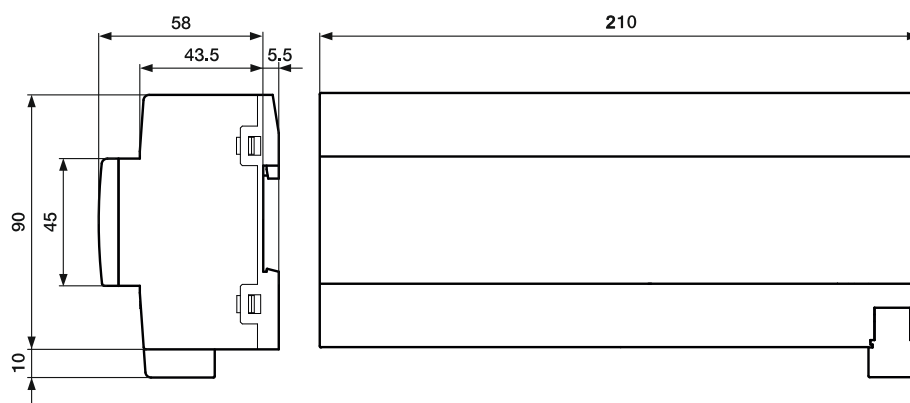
Dimensions of 12-fold switch actuator MDRC (specifications in mm)
